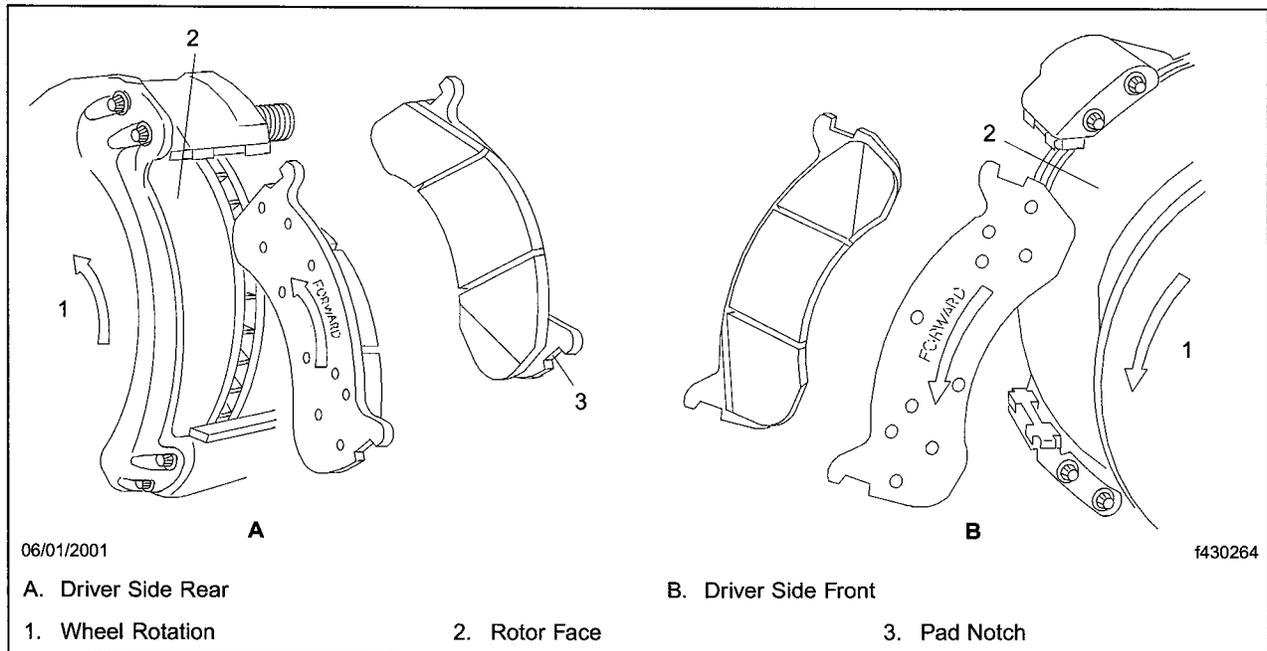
, Replacing Brake Pads on Front and Rear Brakes
